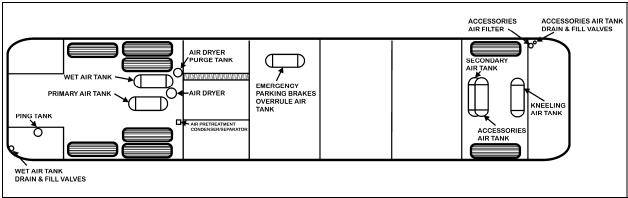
I-BEAM FRONT SUSPENSION AIR TANKS LOCATION
